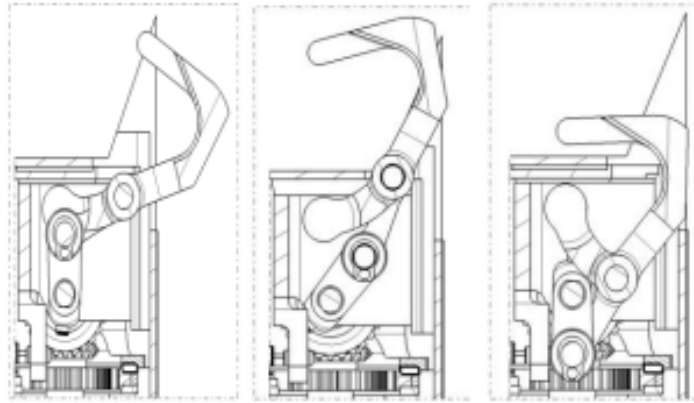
SIROM latching mechanism. Left to right: ready to capture, captured, final engagement[64].
